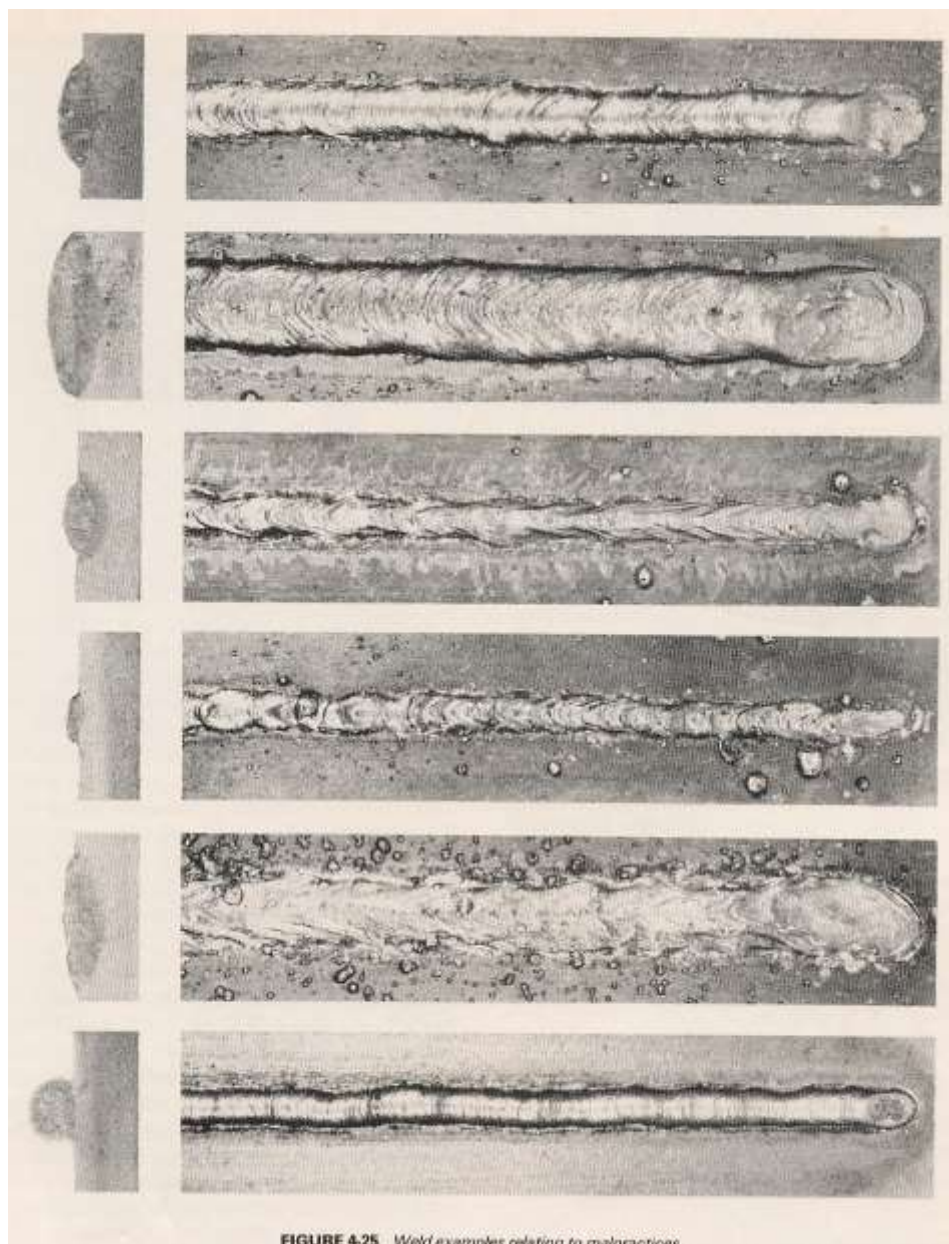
Weld examples relating to malpractices.
